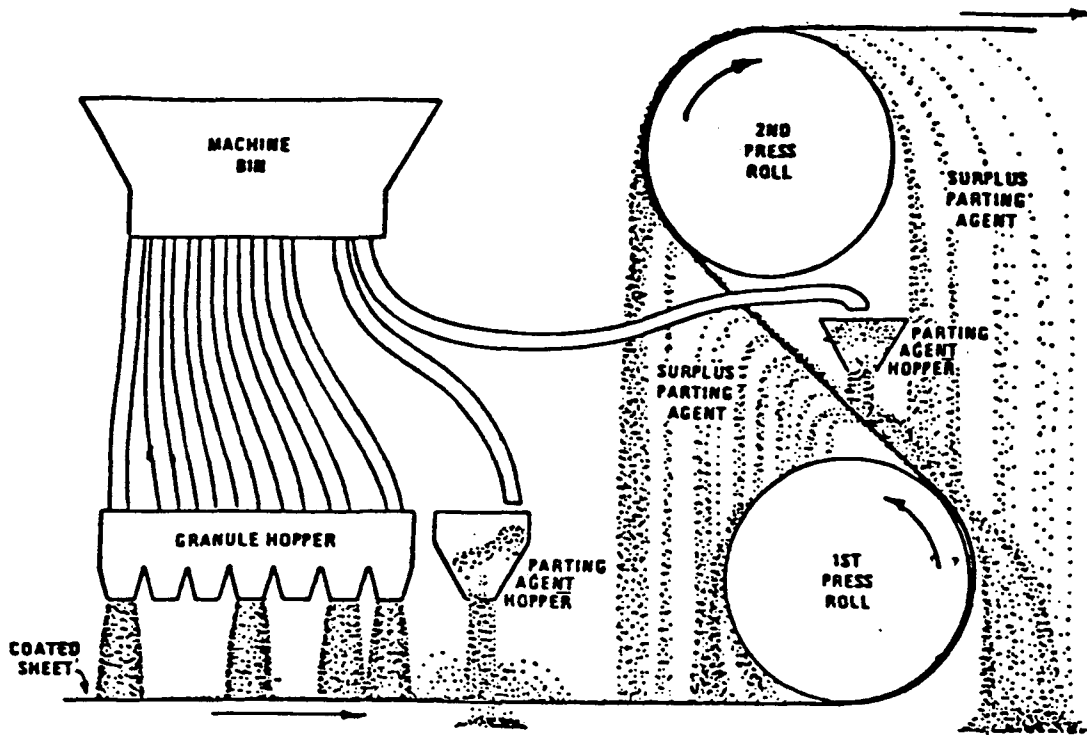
Surfacing section of typical asphalt roofing manufacturing line.
